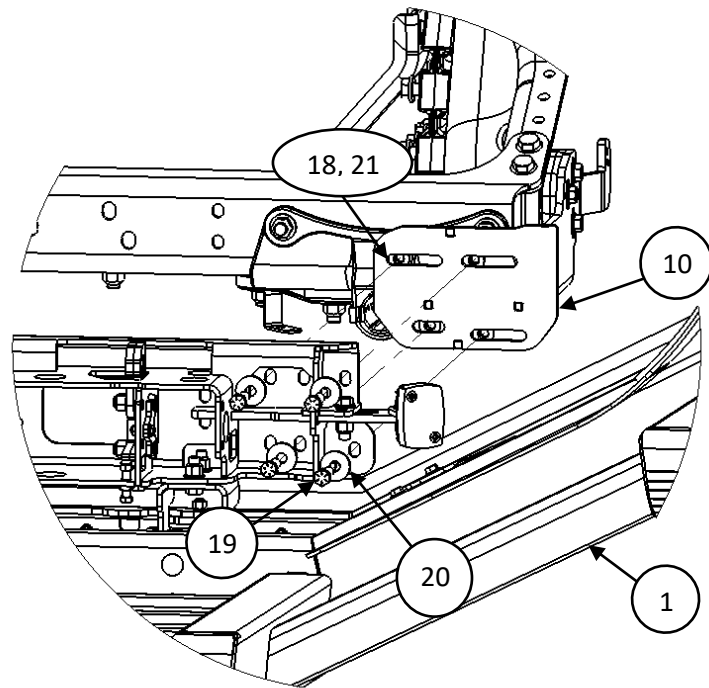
Universal Bracket Installation Detail View (Driver Side Shown).
